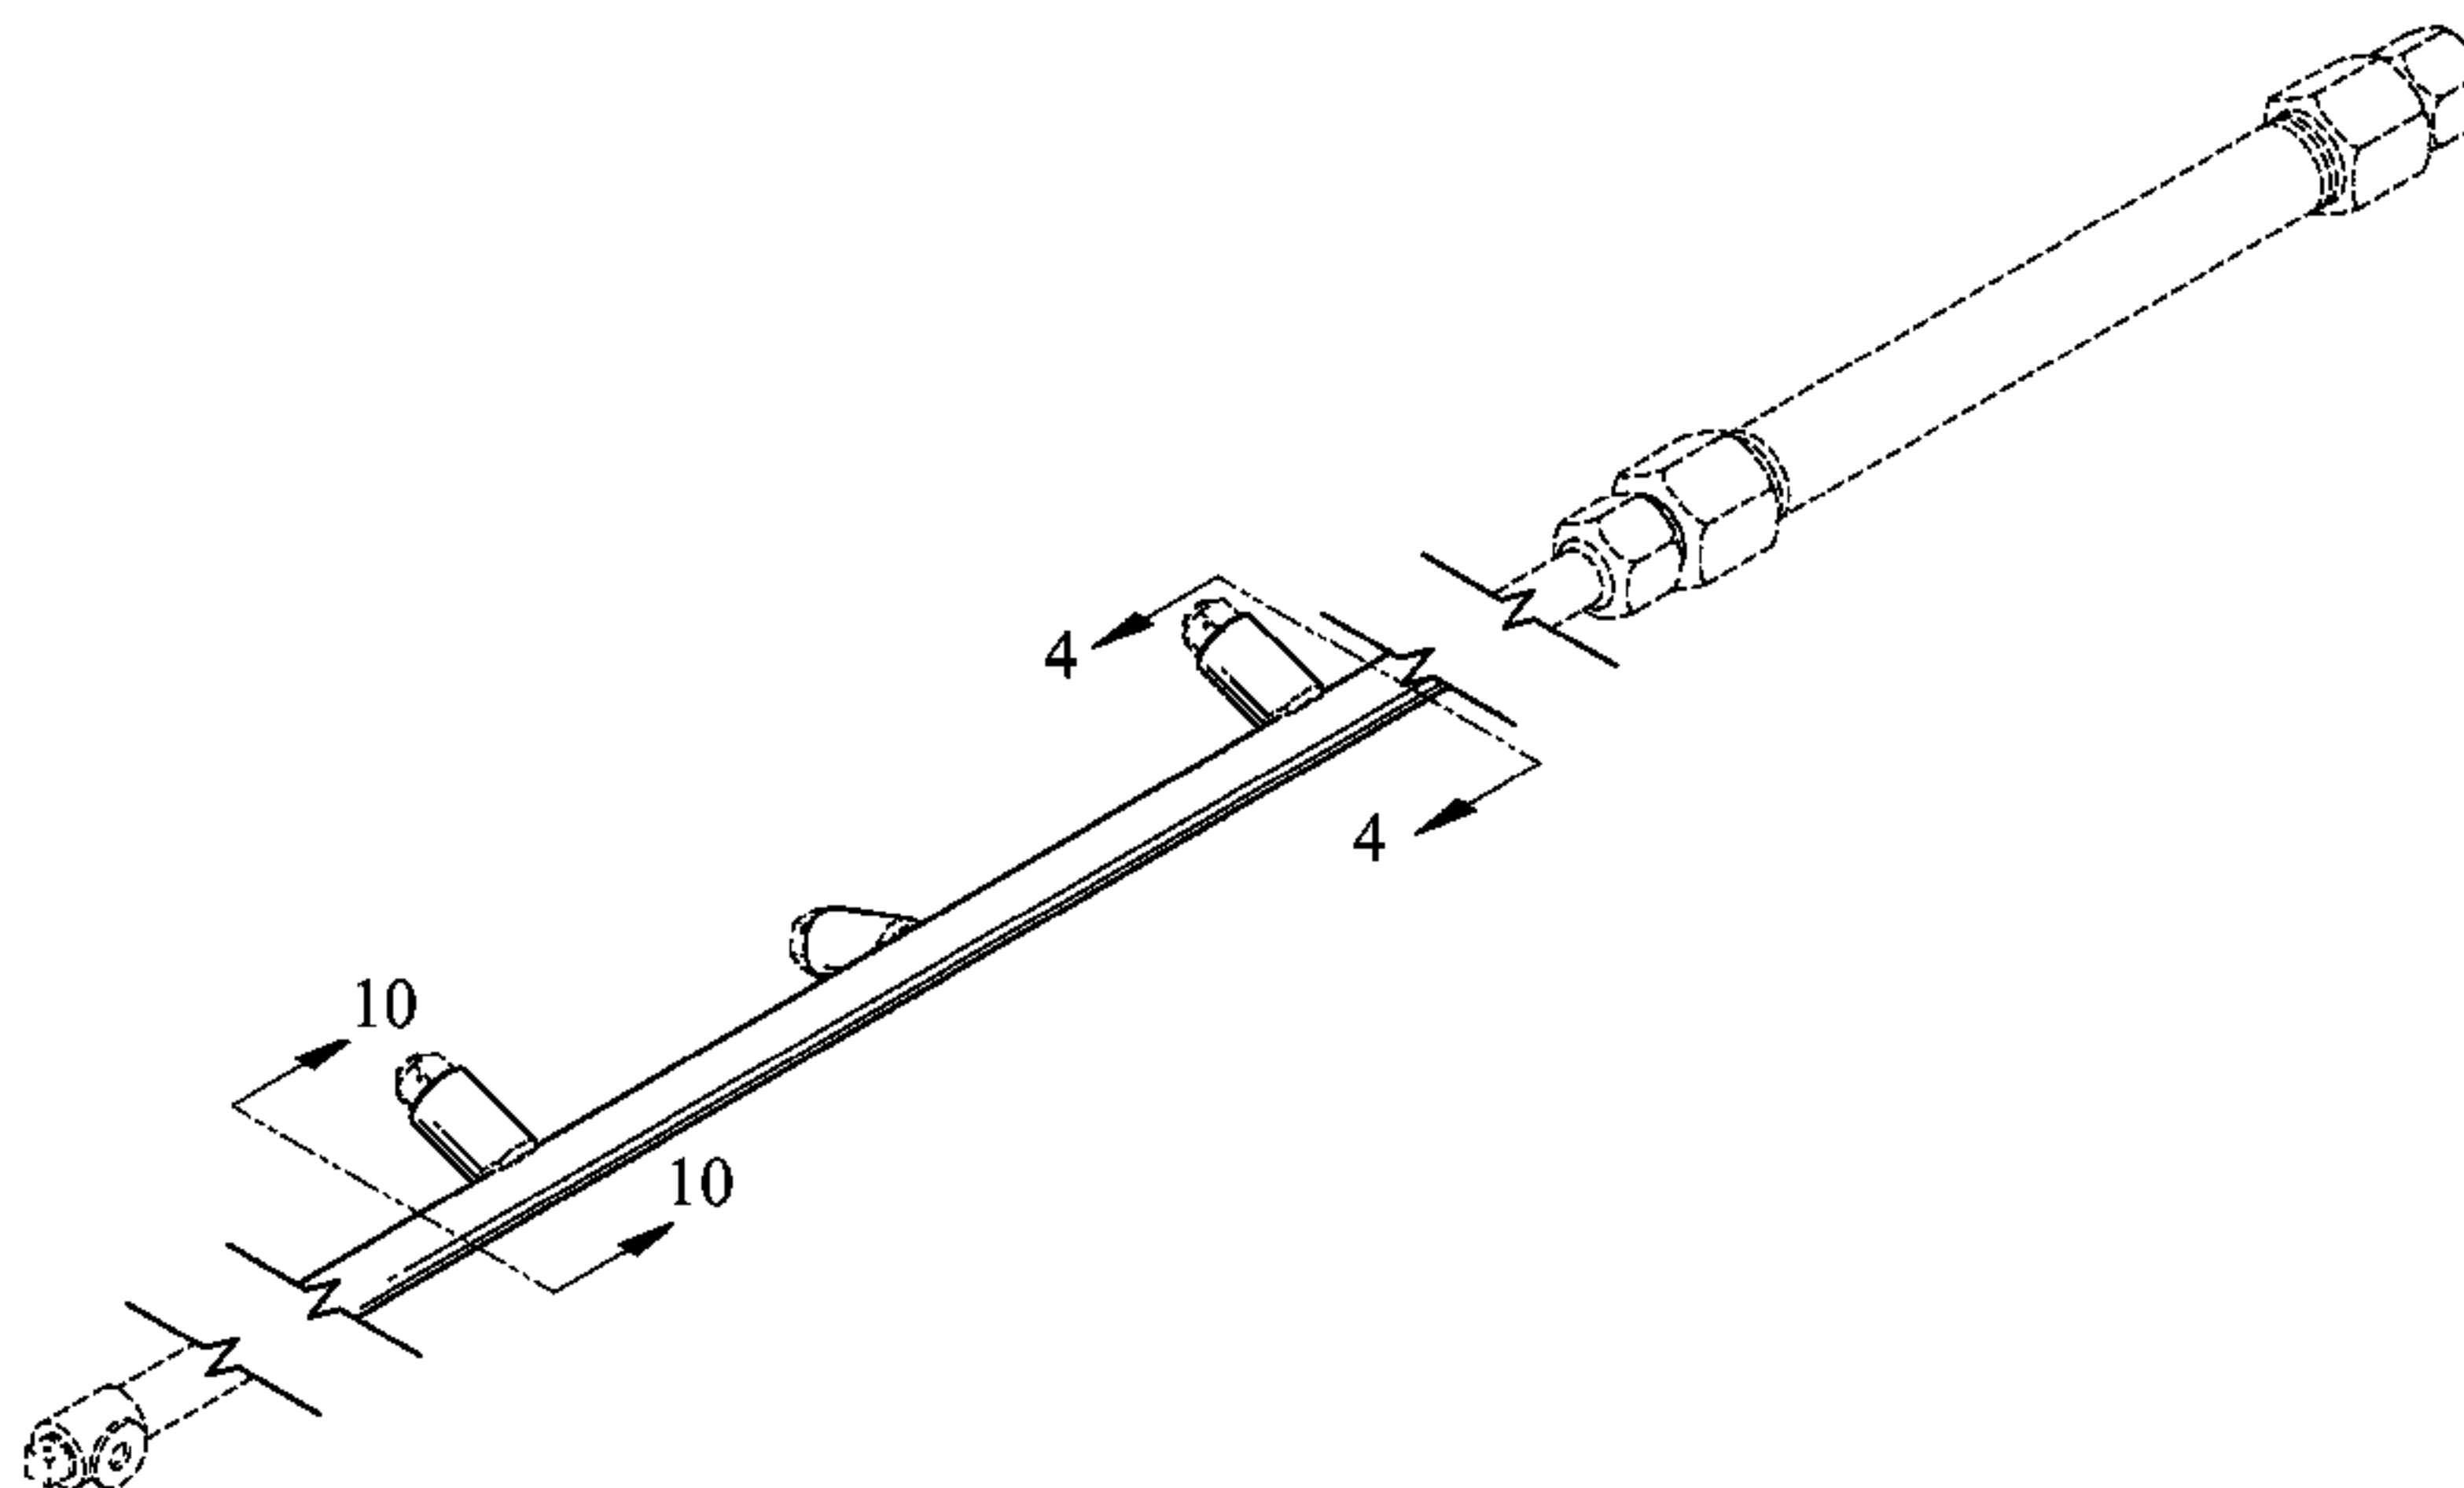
is a front plan view of the nozzle tubing having offset nozzles of FIG. 1;
